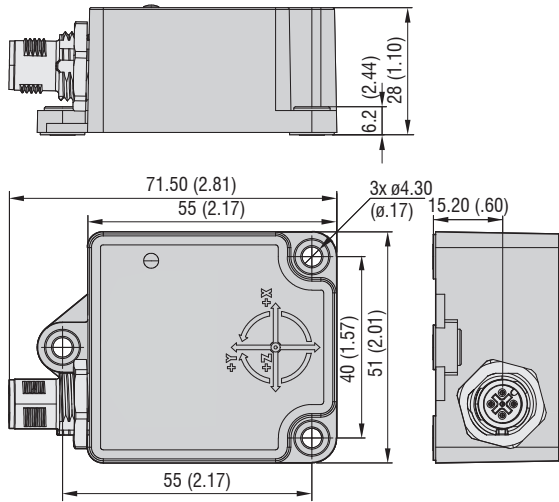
Dimensional drawing INC5502D-360/90-P-S-CO, dimensions in mm (inches, rounded off)
